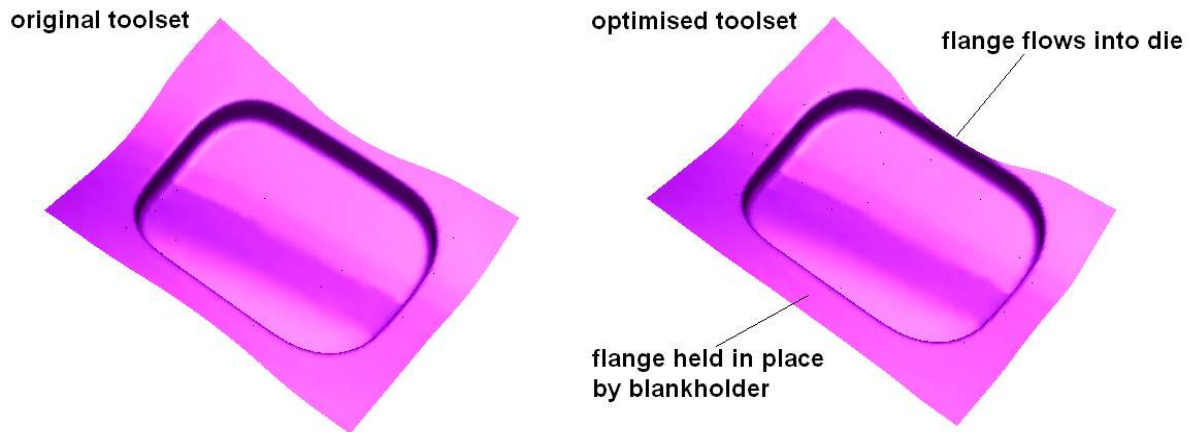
blank shape after forming with the original tools (left) and the tools optimised with the DA method (right)
